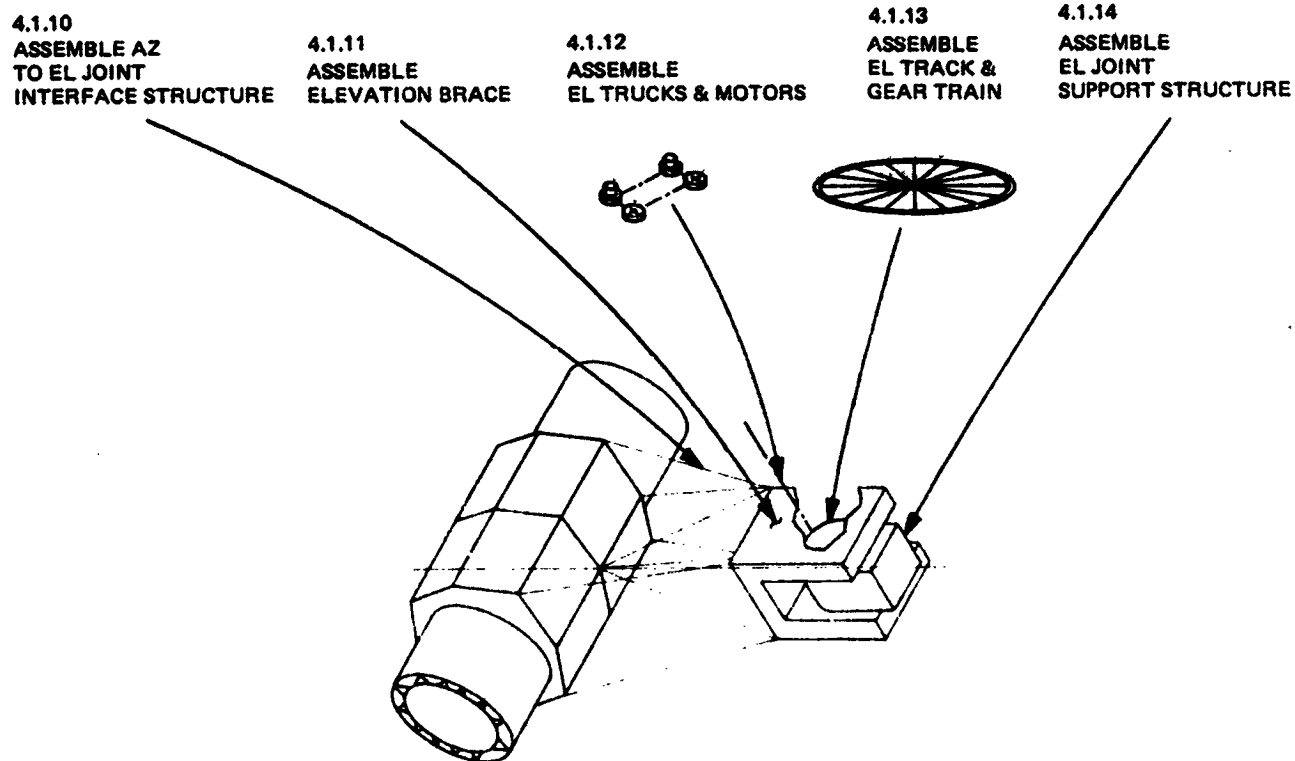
Level 3 Functional Flow: Assemble Rotary Joints (Sheet 3 of 3)
